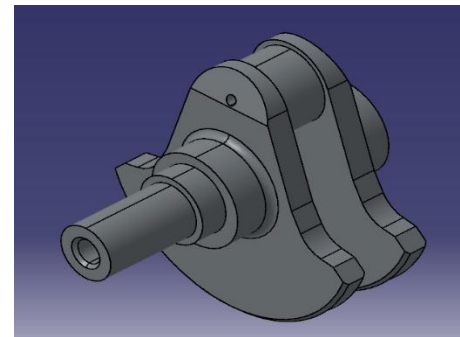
Solid model of single cylinder crankshaft with hole present axially along crankpin
